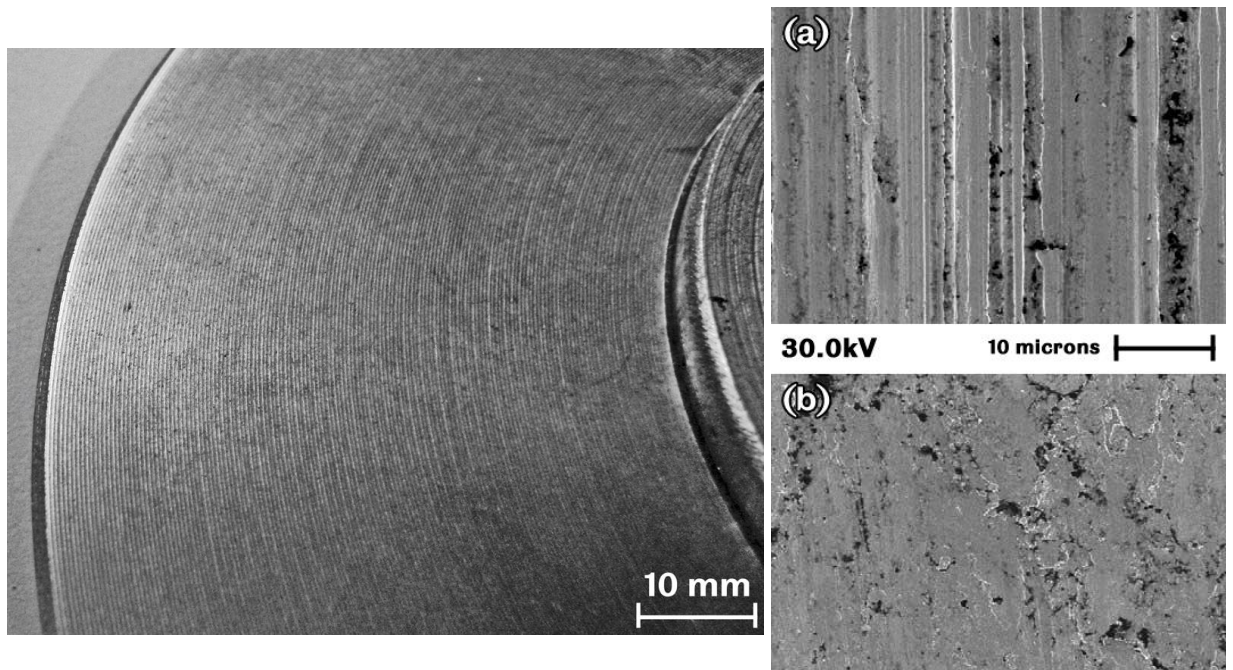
Photograph of the machined surface of a SAE J431 G10 grey cast iron brake rotor (from present studies) and electron micrographs taken by Österle et al. [25] of EN-GJL-250 grey cast iron brake rotor (a) machined surface and (b) worn surface with transfer layer after multiple braking cycles.
